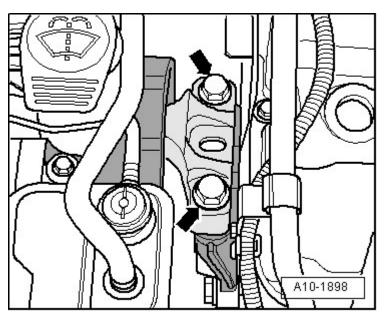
Identifying Engine Mount To Engine Mount Bracket Bolts Courtesy of AUDI OF AMERICA, LLC
